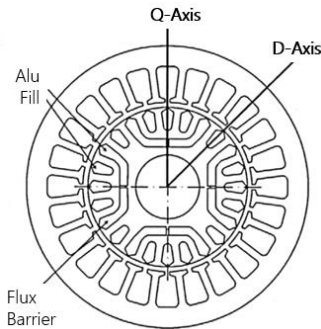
Flux barrier with cage rotor, courtesy of [11]
